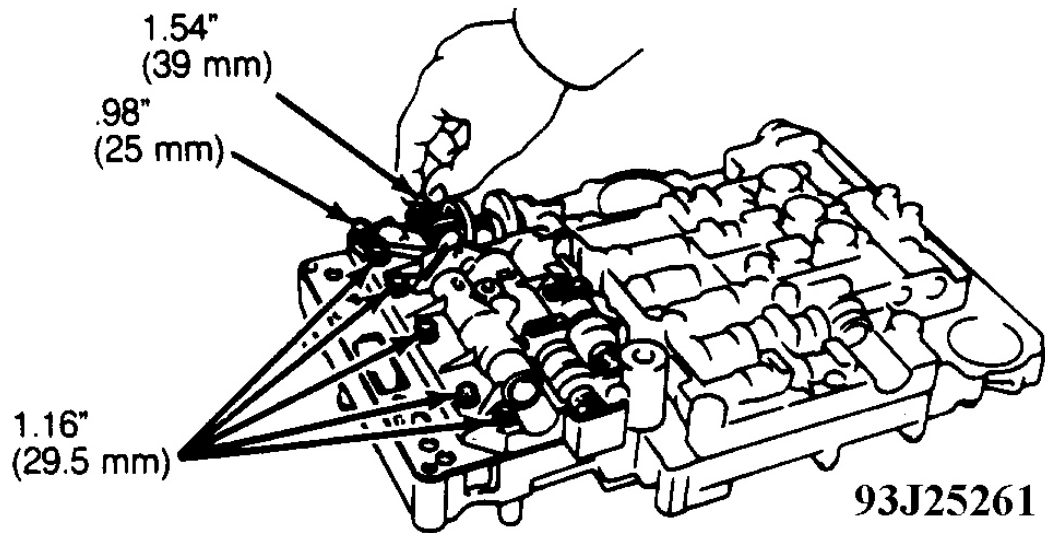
Locating Valve Body Bolts (3 Of 3)
